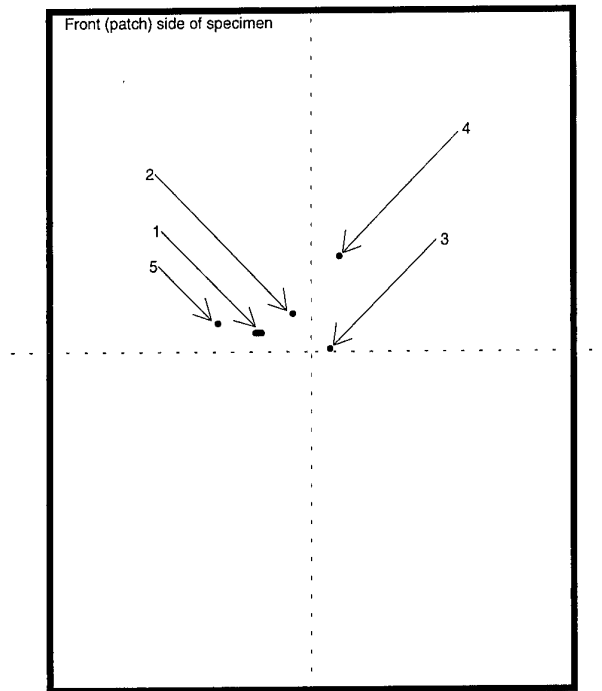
The five cracks located by fluorescent dye penetrant on the front of the specimen (structural integrity monitor side). The visual intensities are a good indication of the crack size and are as follows; crack 1-very bright, crack 2-bright, crack 3-bright, crack 4-weak and crack 5-weak
